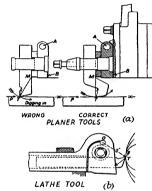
Spring Tools for. (a) Planer (b) Latter
